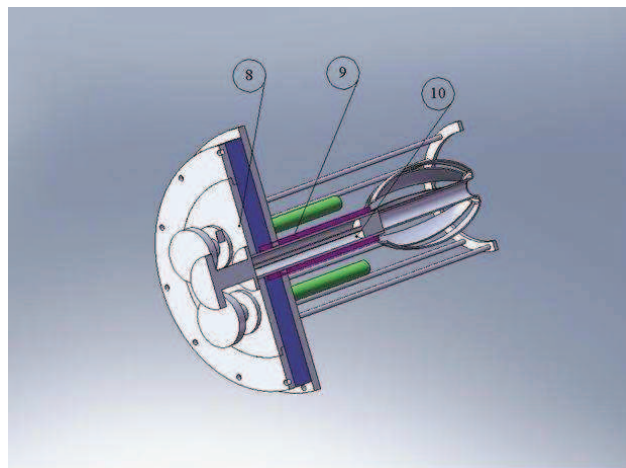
Rear view with an axial cut of the QSPA –SLIDE plasma source, showing the cathode gas valve. 8- cathode flange, 9- ceramic tube of the cathode, 10- gas valve plate.
